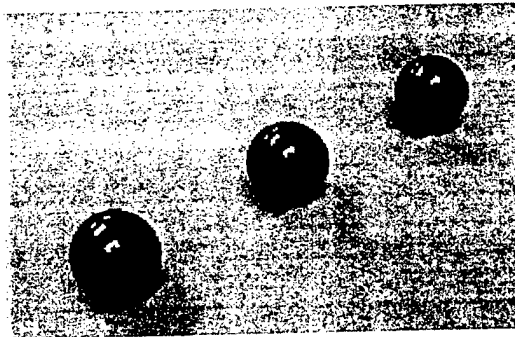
Solid lubricant sputtered coated balls from cage fixture.
